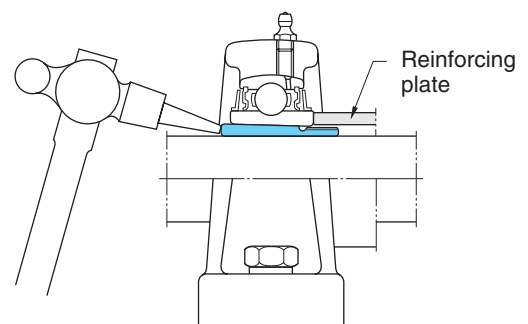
Fitting adapter sleeve to bearing with tapered bore
